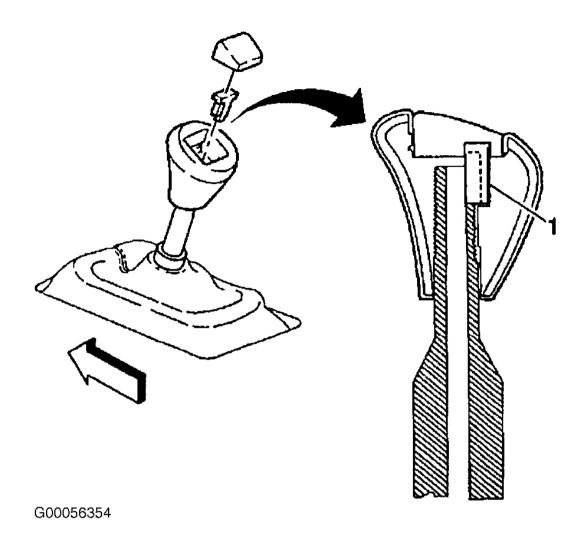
Removing/Installing Shift Control Knob & Retainer Courtesy of GENERAL MOTORS CORP.
